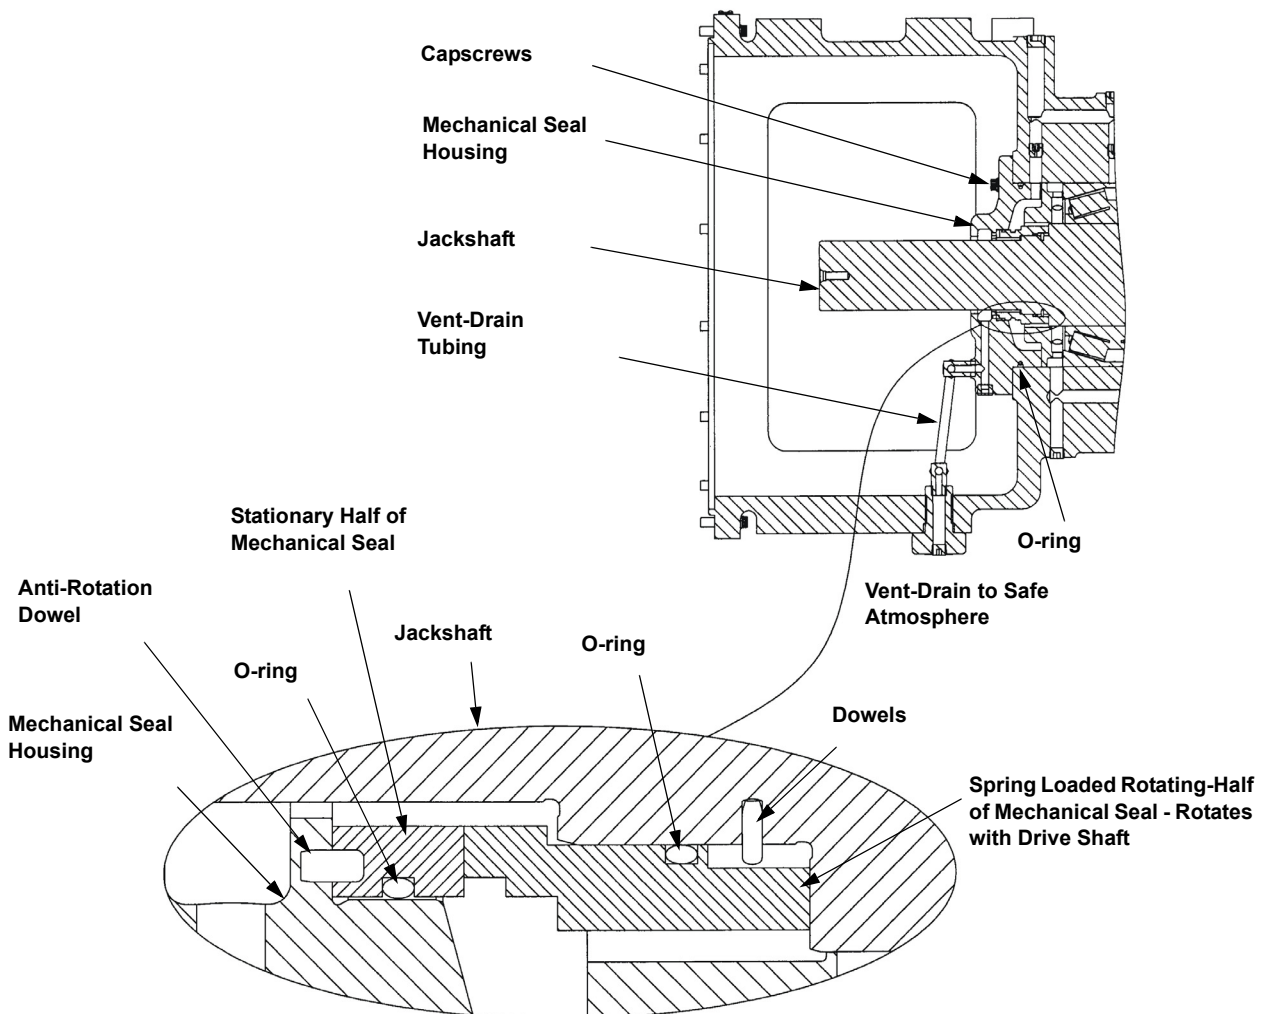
MECHANICAL SEAL SIDE VIEW - TYPICAL
